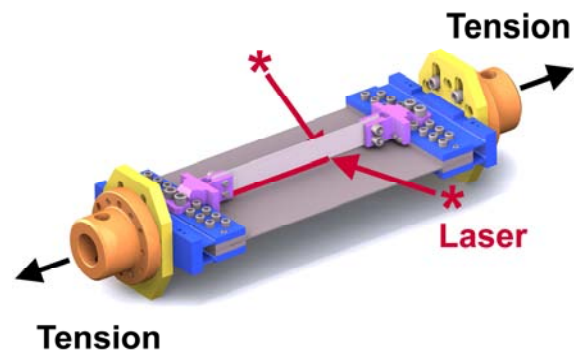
Principle of mechanical tensioning during laser beam welding of skin-stringer joints to improve damage tolerance properties of such configurations.
